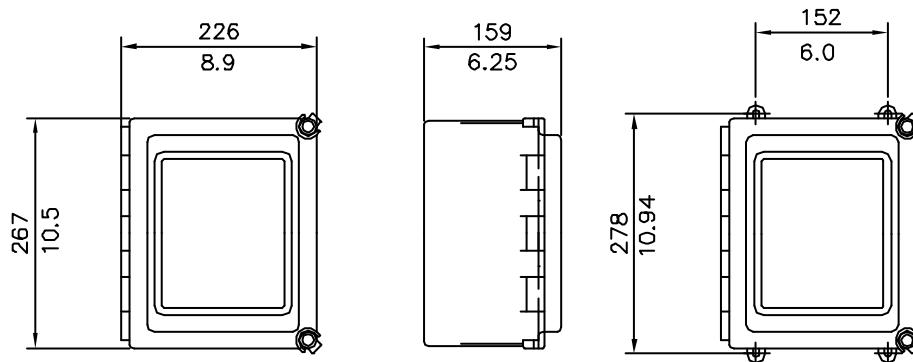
Indicating transmitter: dimensions (mm/in) and mounting feet measures
